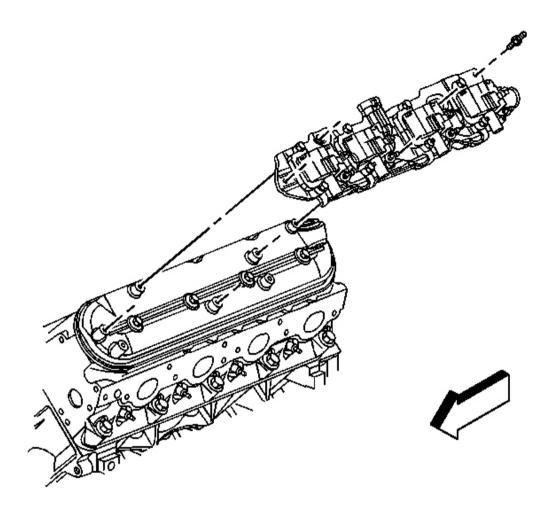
Left Ignition Coil Bracket & Studs Courtesy of GENERAL MOTORS CORP.
